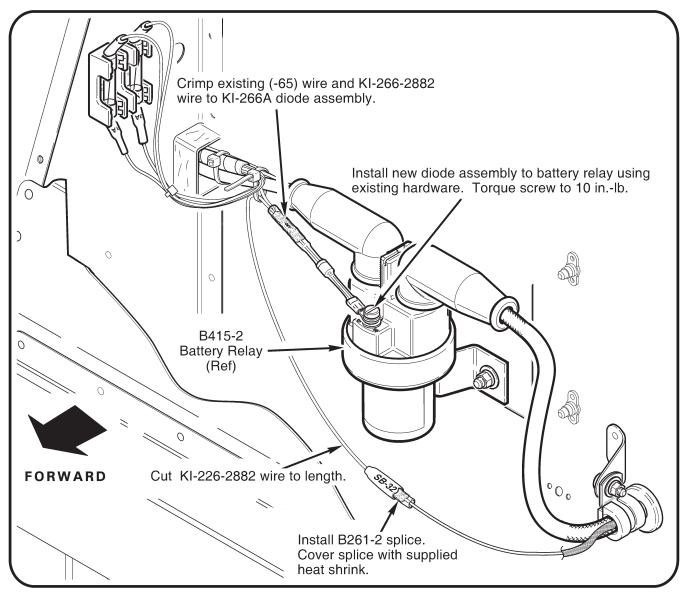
Installation of supplied diode assembly (view looking aft & inboard)
